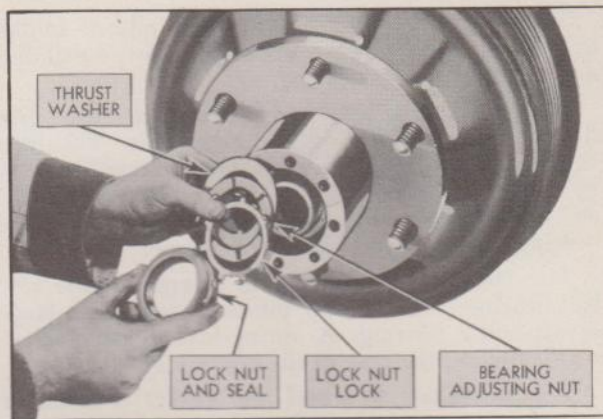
Installing Thrust Washer, Adjusting Nut, Lock Nut and Lock Nut Lock
